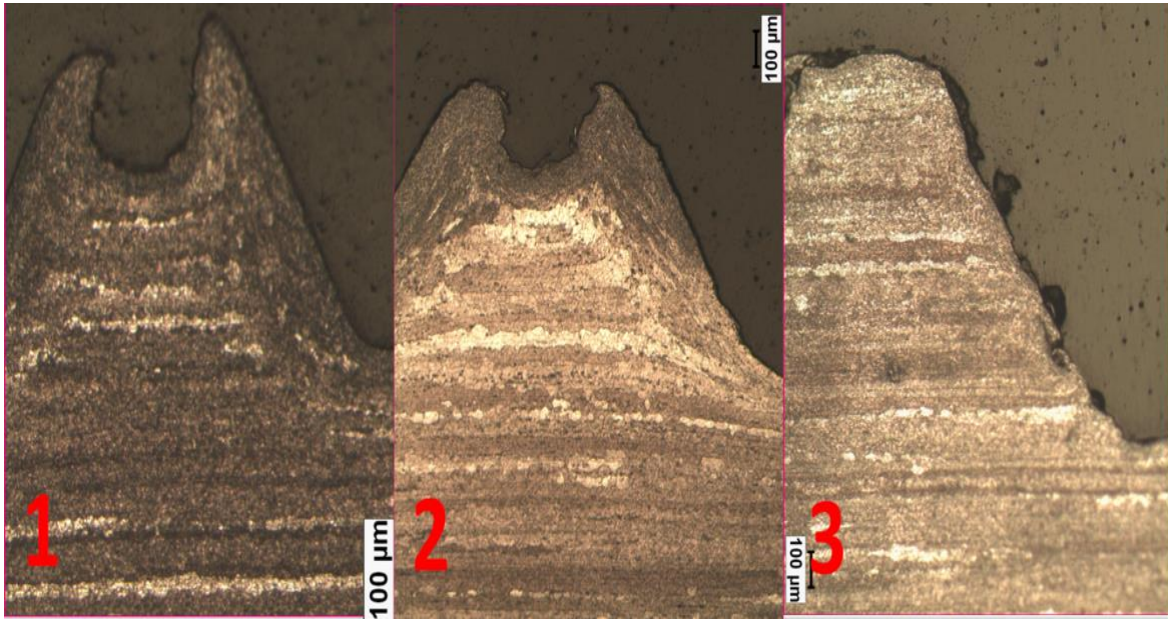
Microscope Picture of the Threads 1- Cold Form, 2-Punch Tap 3- Thread Mill
